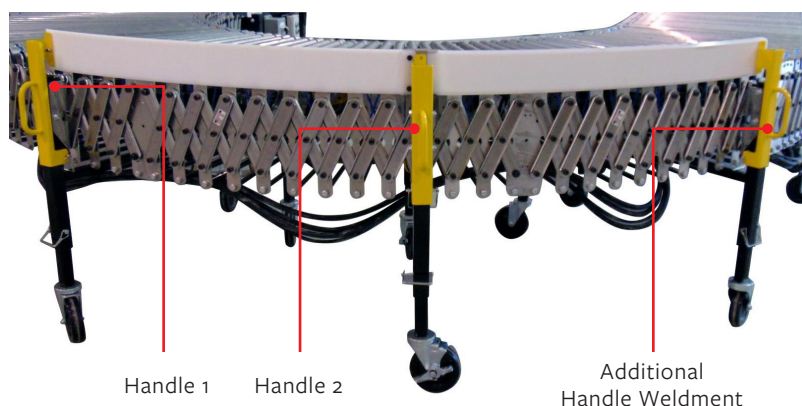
Dual Zone Assembly for a Powered Flex Conveyor with Model 17 handles
